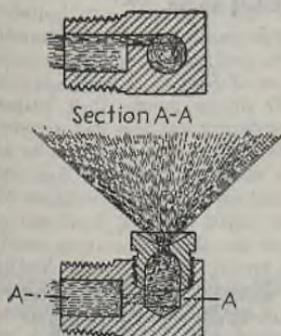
A small hollow-cone nozzle of the tangential type. (Courtesy of The Spray Engineering Co.)
